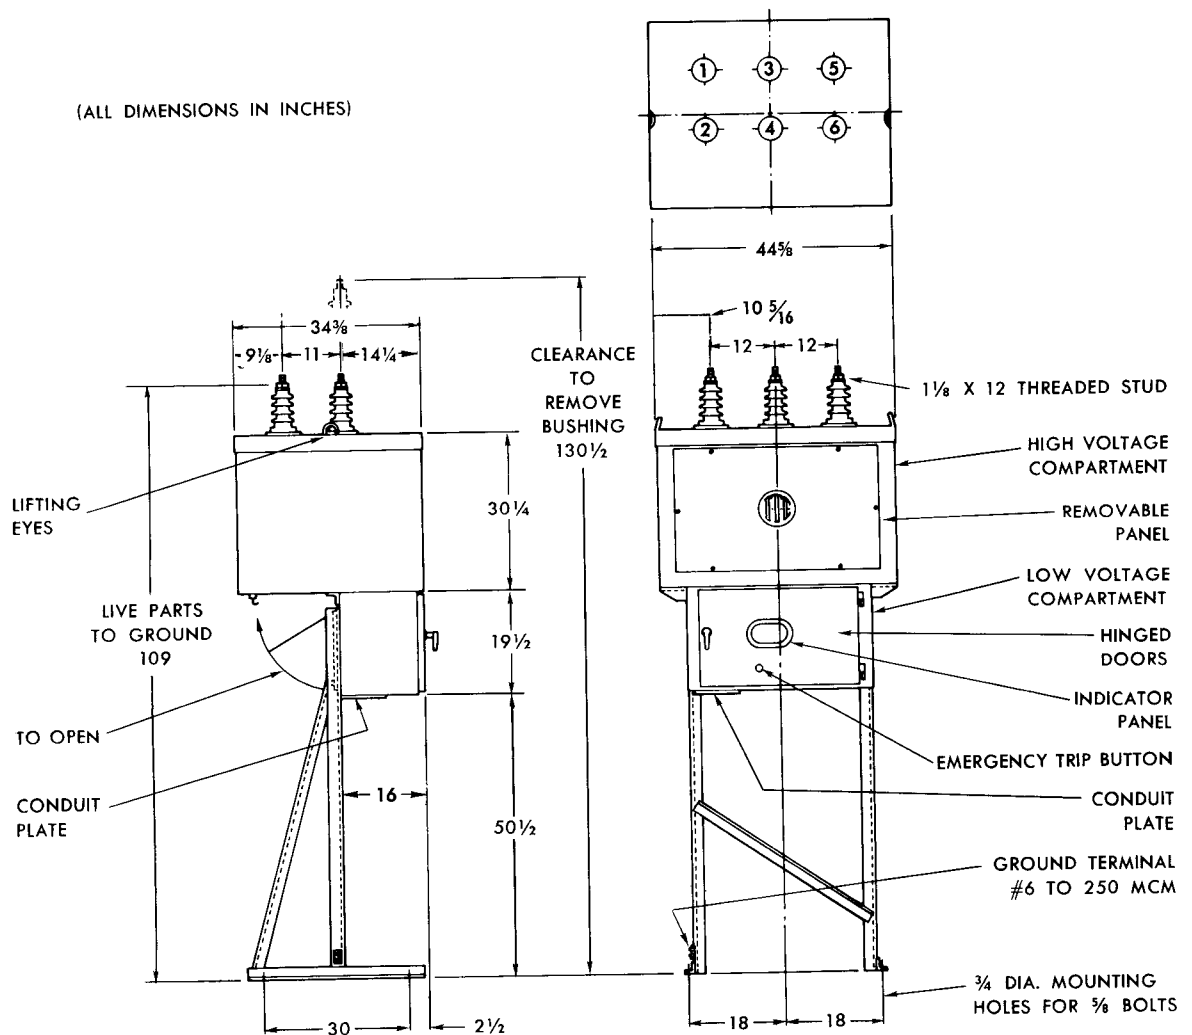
Metal-Housed Non-Relayed Basic Breaker (Model VBM) Assembled for Station Mounting.
